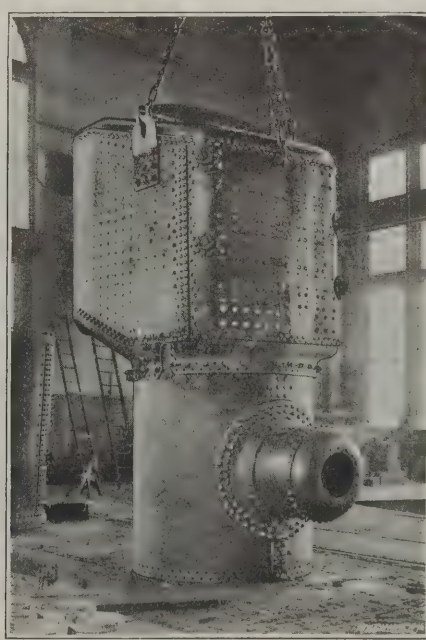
Back End bolted to the Dome Course prior to Riveting
